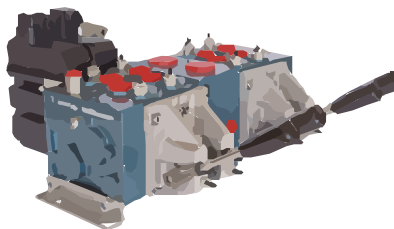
3D CAD drawing of a command valve produced and assembled by Brevini Fluid Power (Power, B. 2016).
